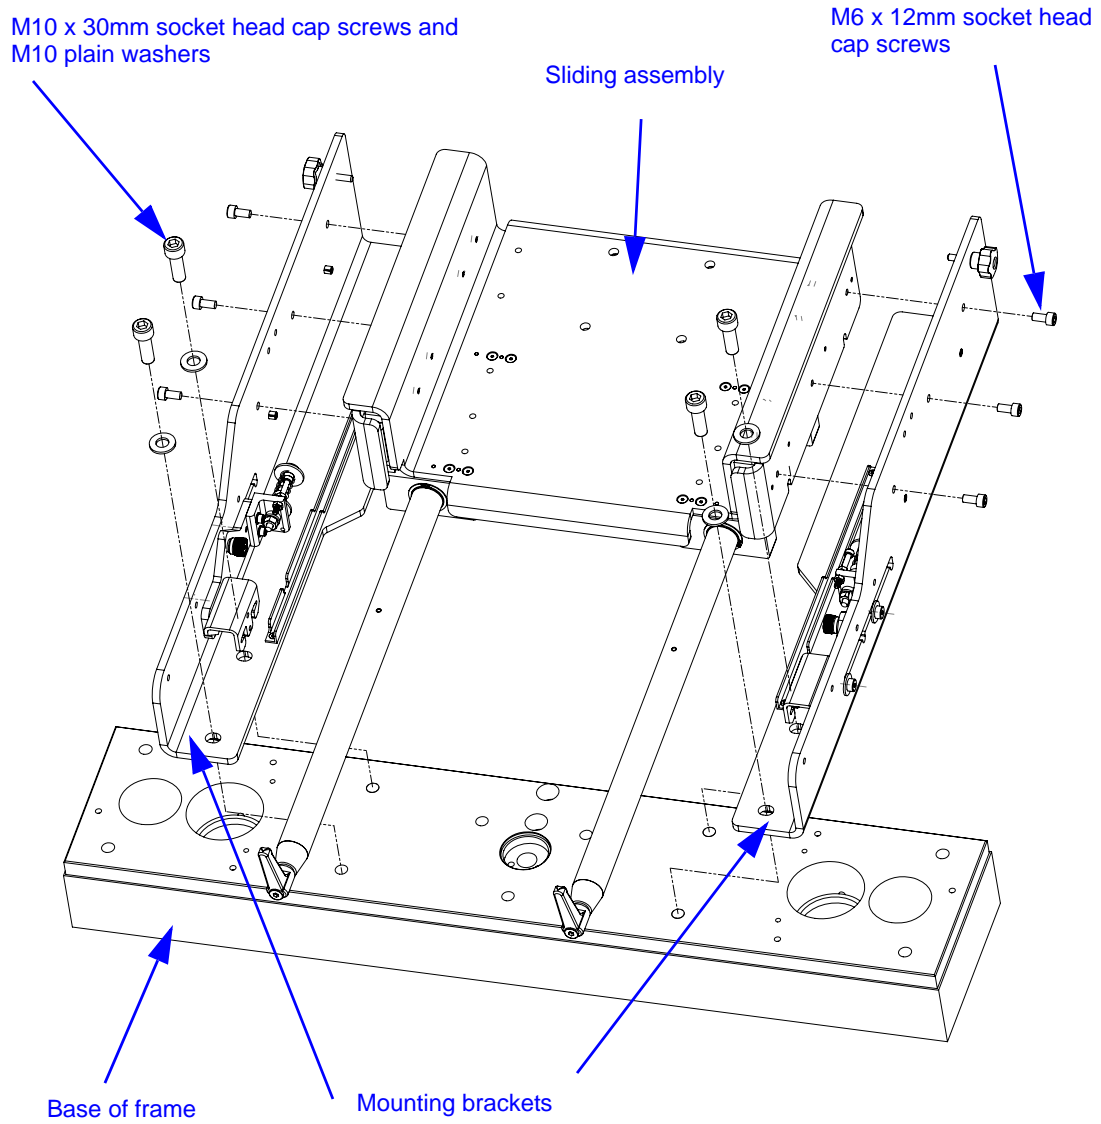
Mounting Bracket Attachment Screws (Electromechanical frames)
